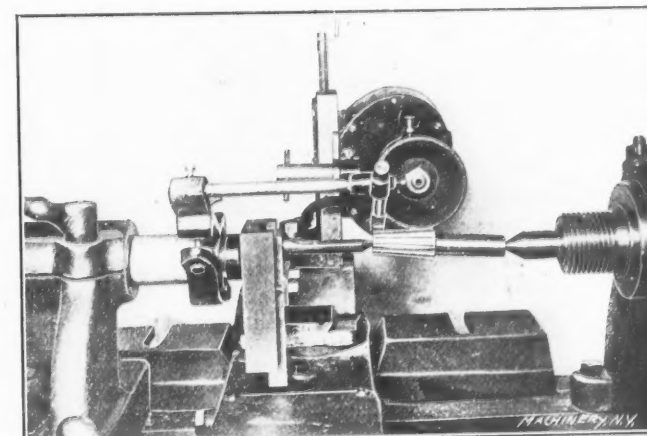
Sharpening a Taper Reamer in the Lathe using Adjustable Tail Center.
